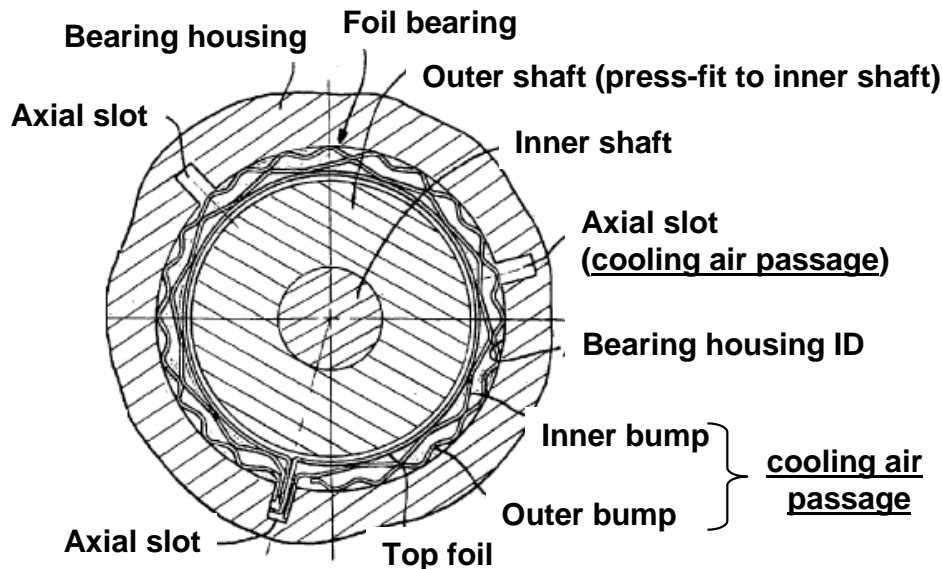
Schematic view of radial foil bearing and its housing in an oil-free turbocharger. Reproduced from [29].
